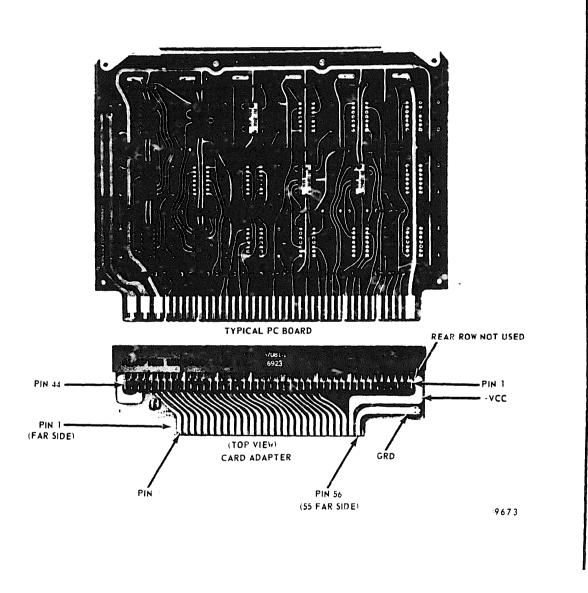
Printed Circuit Card Adapter MX-9090/USM-371 (44/88 Pin Anelex)
